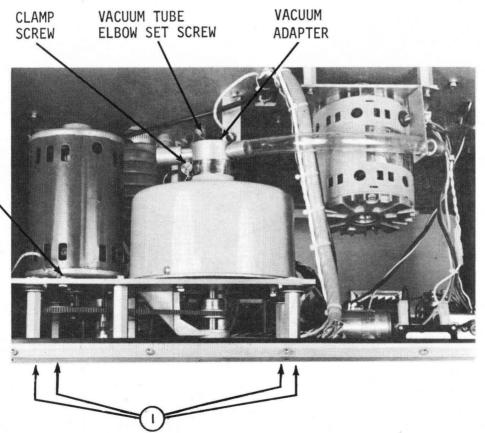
Removal of Vacuum Blower Motor Assembly
